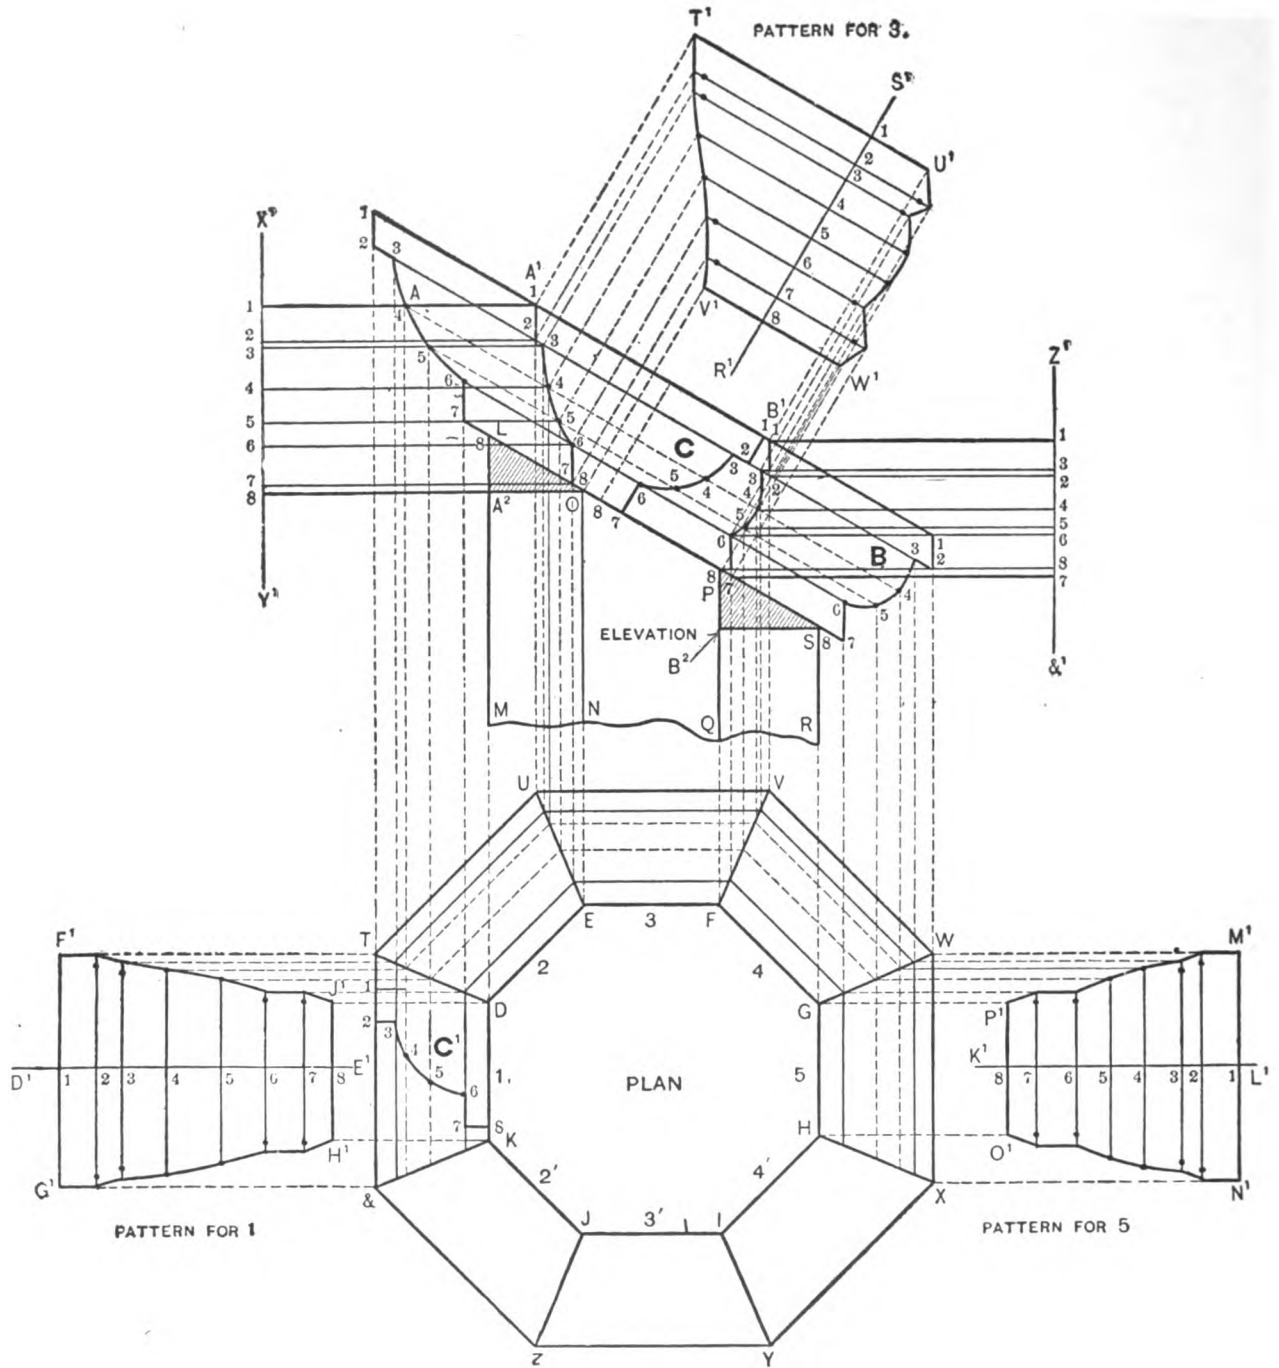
Plan, Elevation, Miter Lines and Patterns
